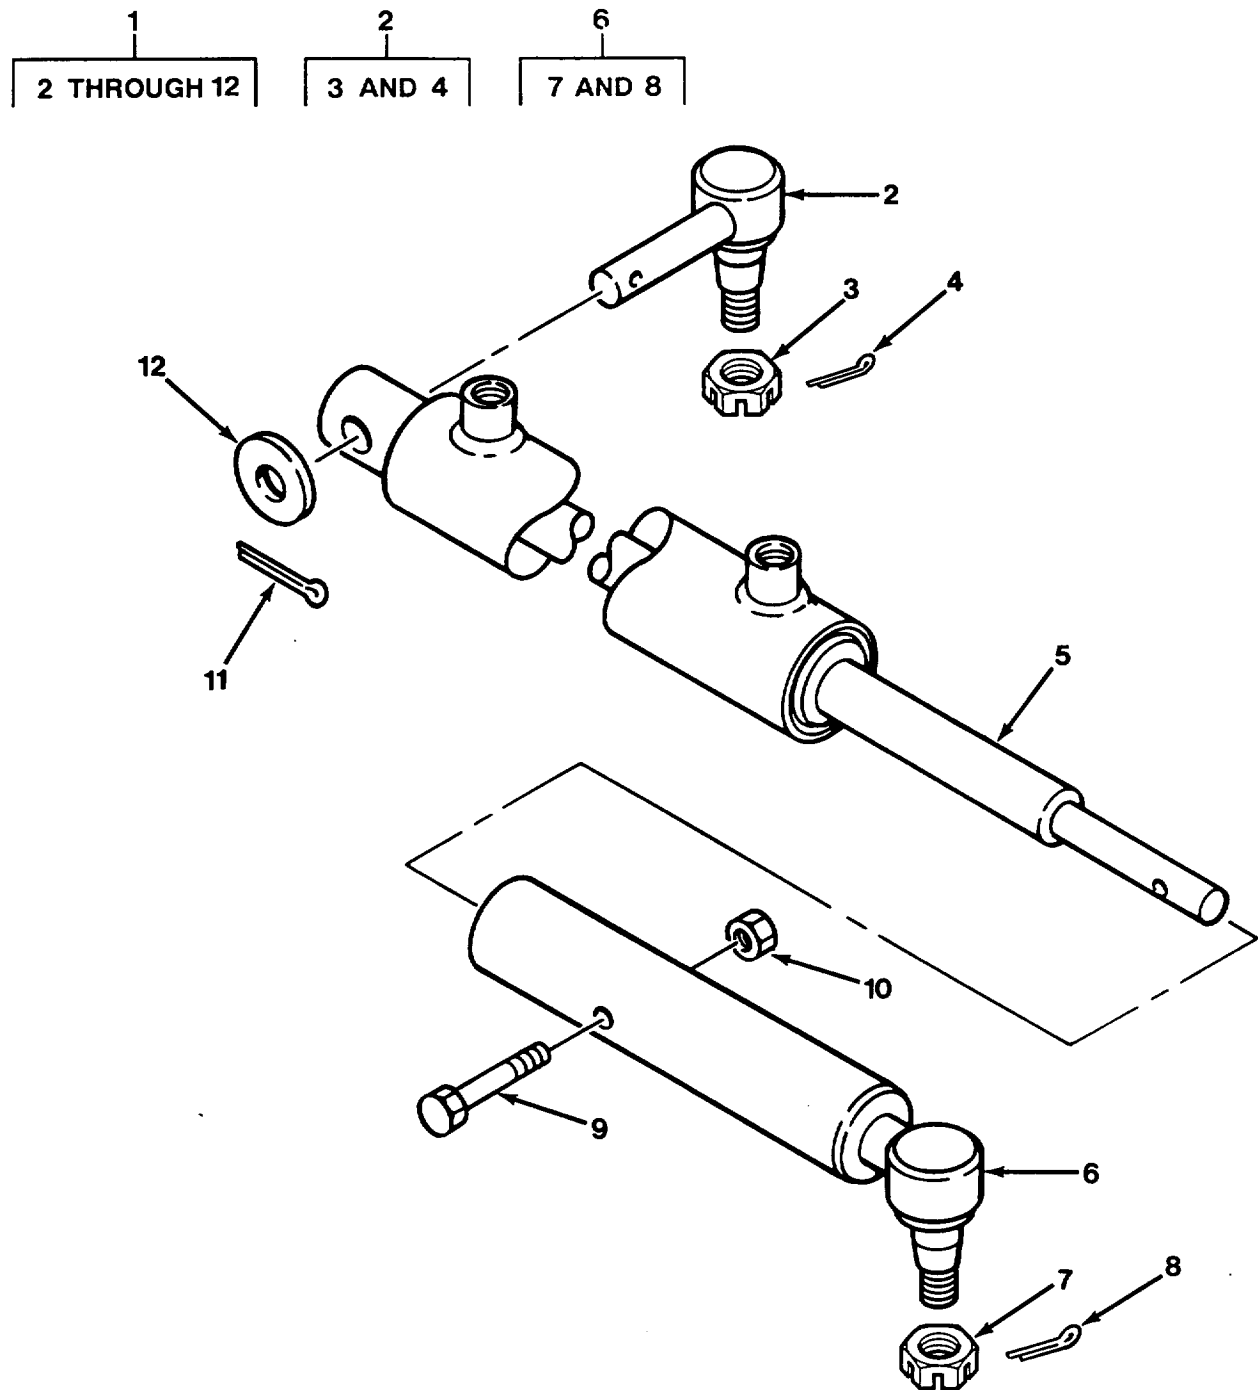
CYLINDER ASSEMBLY SIDE SHIFT
